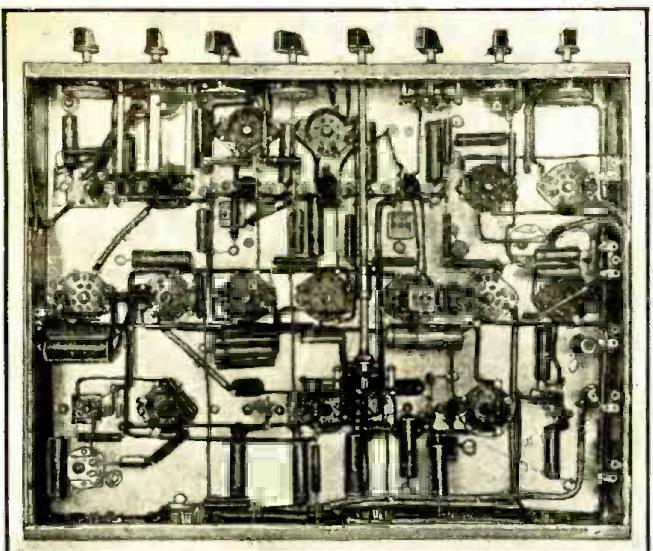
Fig. H. Under-side view of Chassis No. 2 showing arrangement of wiring.
